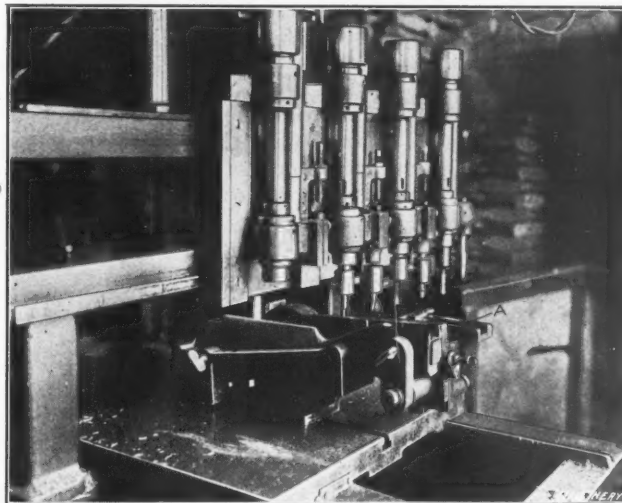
Profiling Machine for cutting out Forward End of Stock to fit Receiver Tangs
